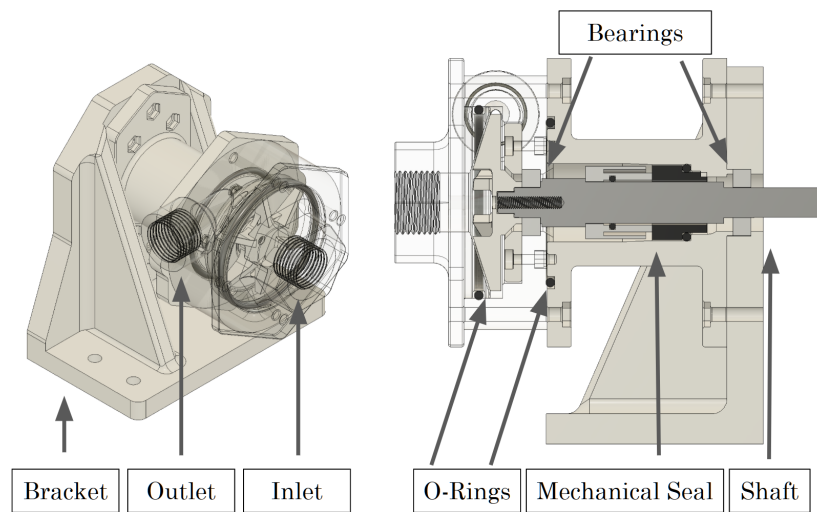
Labeled CAD isotropic and section view of the pump assembly
